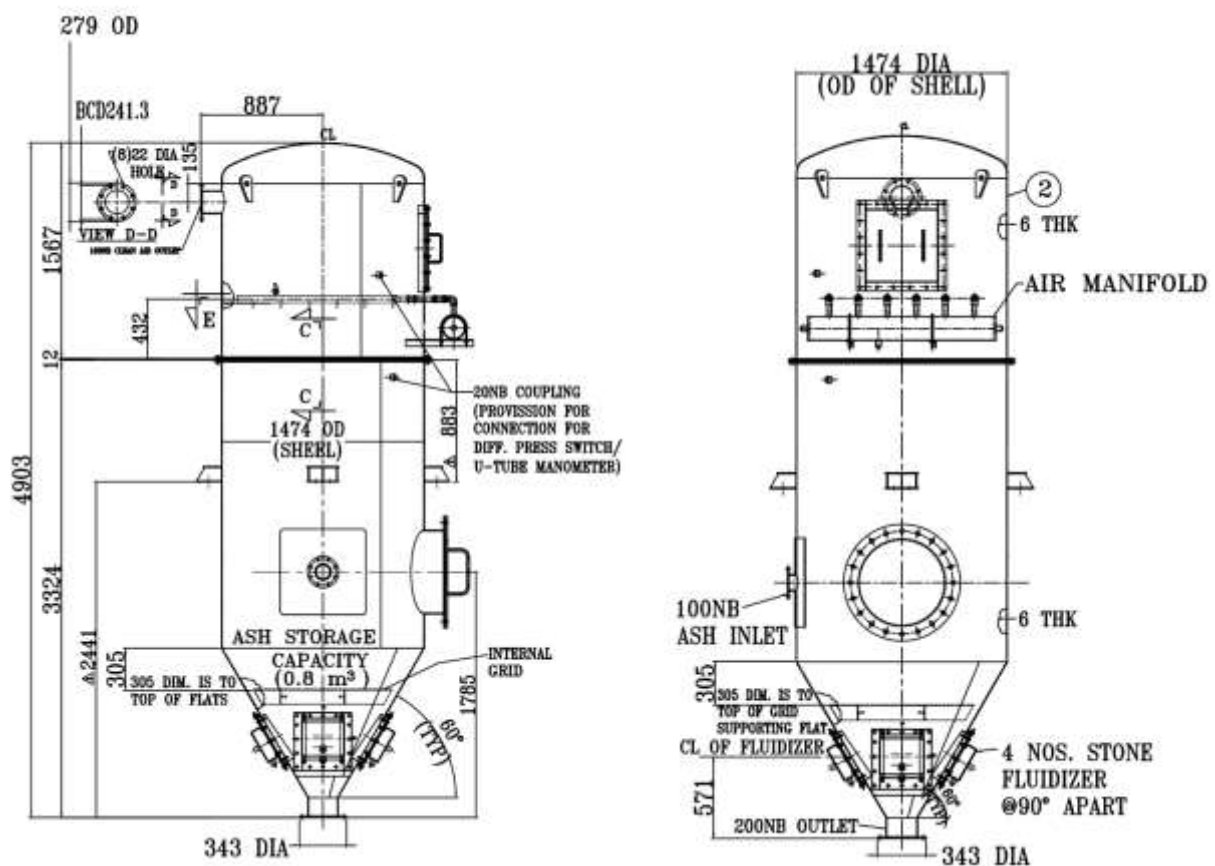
Design drawings of the storage hopper vessel and bag filter assembly
